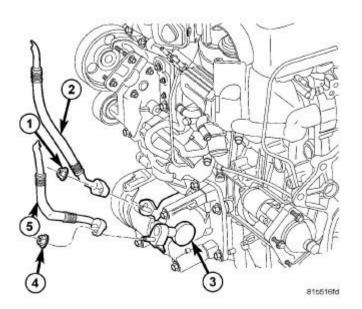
Identifying A/C Refrigerant Lines Courtesy of CHRYSLER LLC
